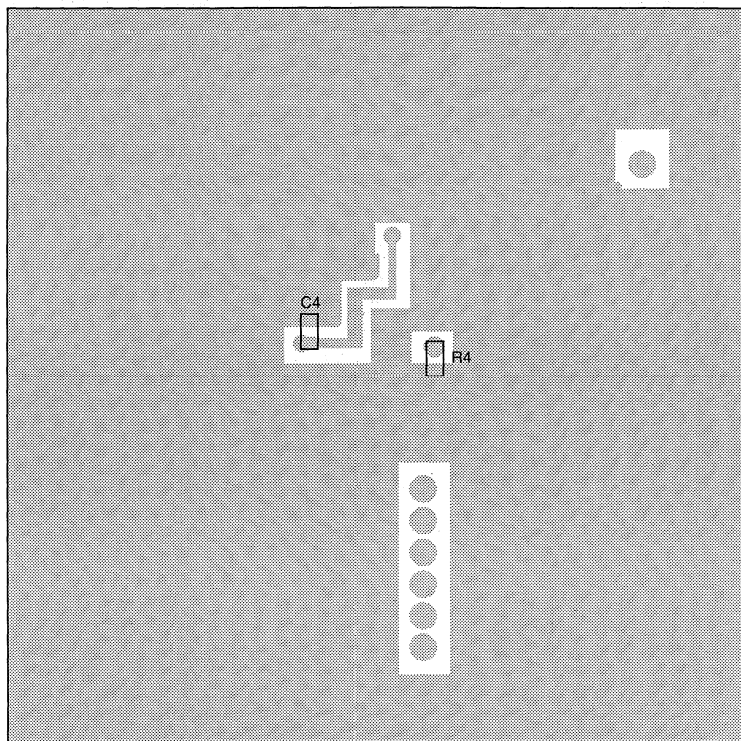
PCB top view with components for TQFP32; test circuit Fig.6.
